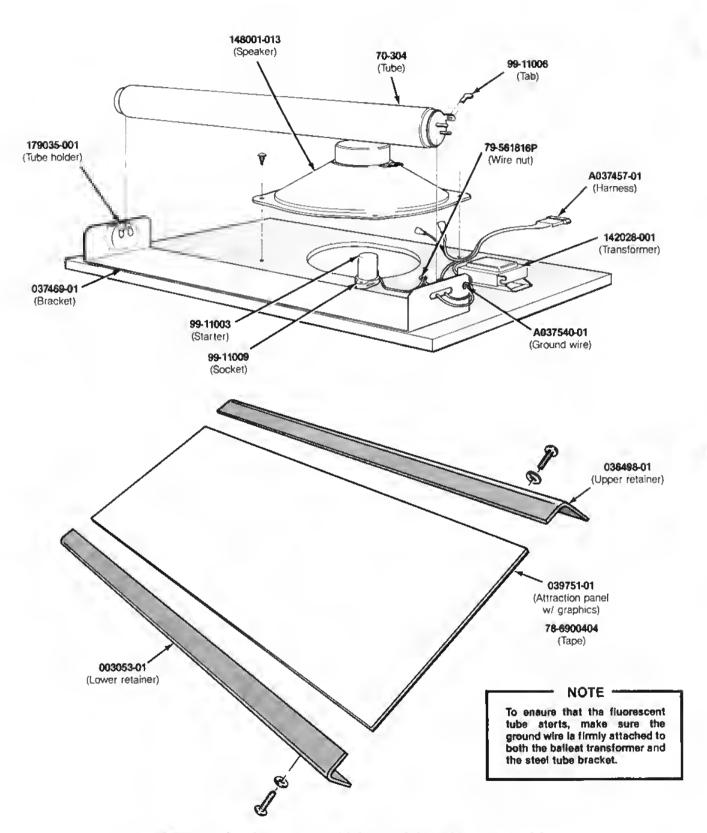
Fluorescent Tube and Speaker Assembly A039737-01 A US-Built Game
